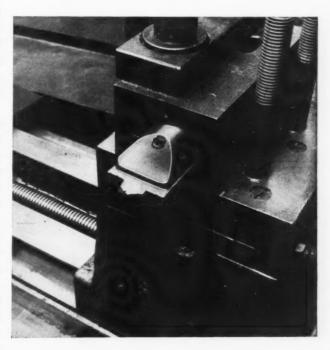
Cutting tool mounted on the slide-rest and employed for forming the pilot bore in the end of the work prior to high-speed trepan-boring
